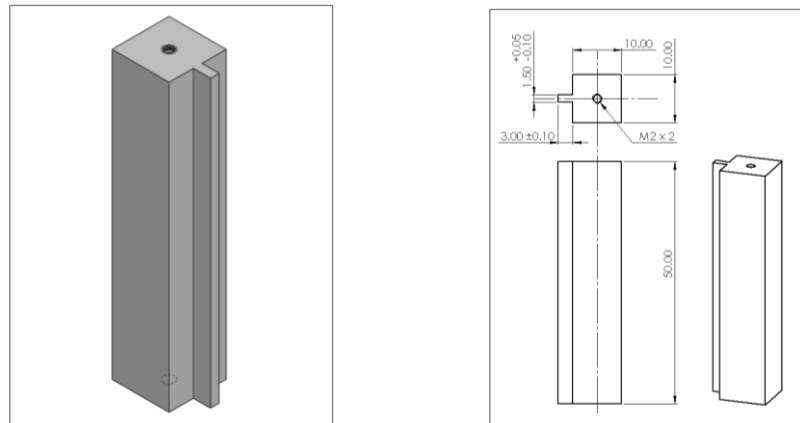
Pusher plate guide with dimensional tolerance.
